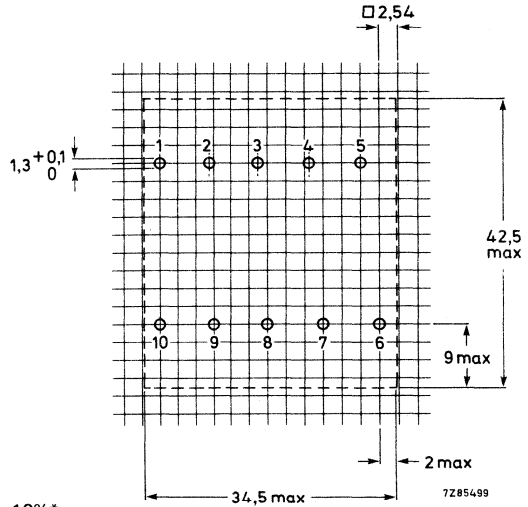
Hole pattern for mounting on a printed-wiring board, viewed from the solder side.
